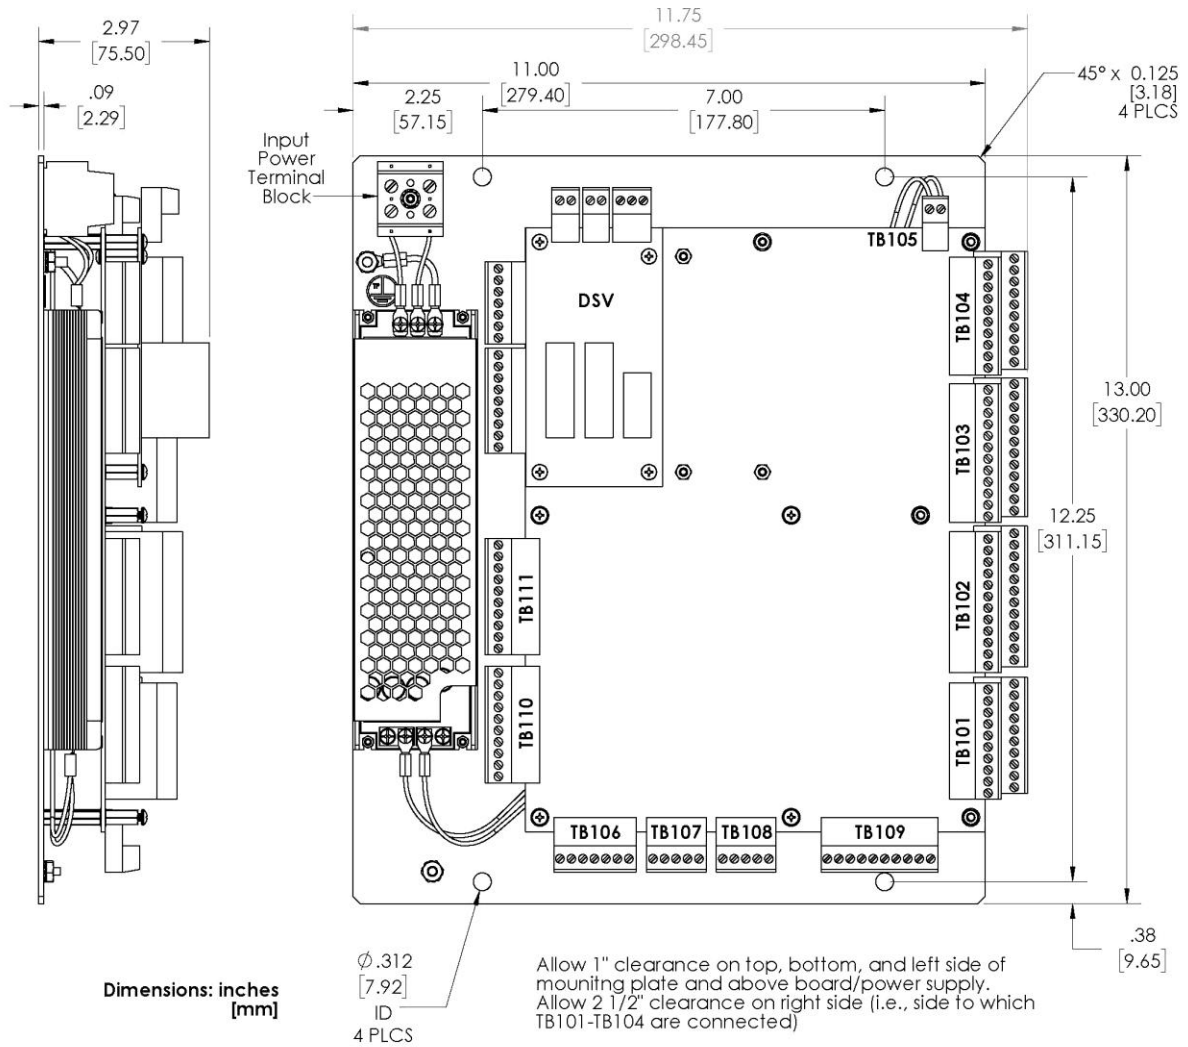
WPC APEX Mounting Plate and Power Supply
